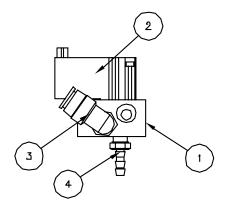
SOLENOID VALVE, 12 VALVE (FOR 20 FT SPRAYBAR)
